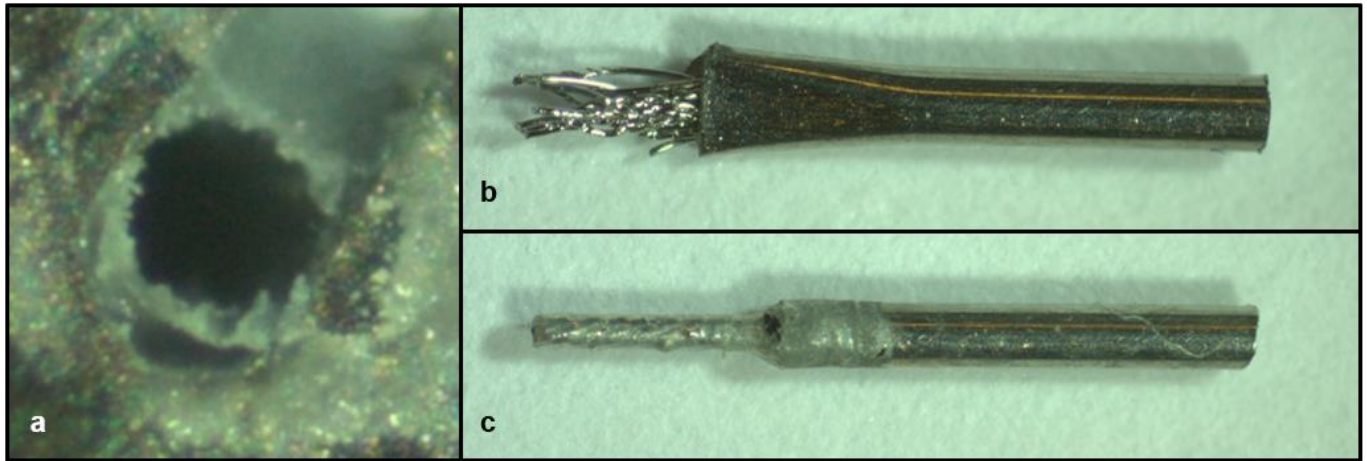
Close-up view of test components after the experiment. a) Top view of the hole in which the steering cable was glued for the glue method. The outline of the individual cables of the steering cable assembly are still visible. b) Using the capillary pinching method, the capillary tube was pinched to clamp the steering cable. The load applied to the steering cable was towards the right. This is because of the circular shape of the capillary tube which fits into a hole in the adapted nut. From the picture can be noticed that the cable is broken inside the capillary tube. c) Using the capillary soldering method, the steering cable was soldered to the capillary tube. The load was applied in the same direction as the pinching method and the steering cable is also broken inside the capillary tube.
